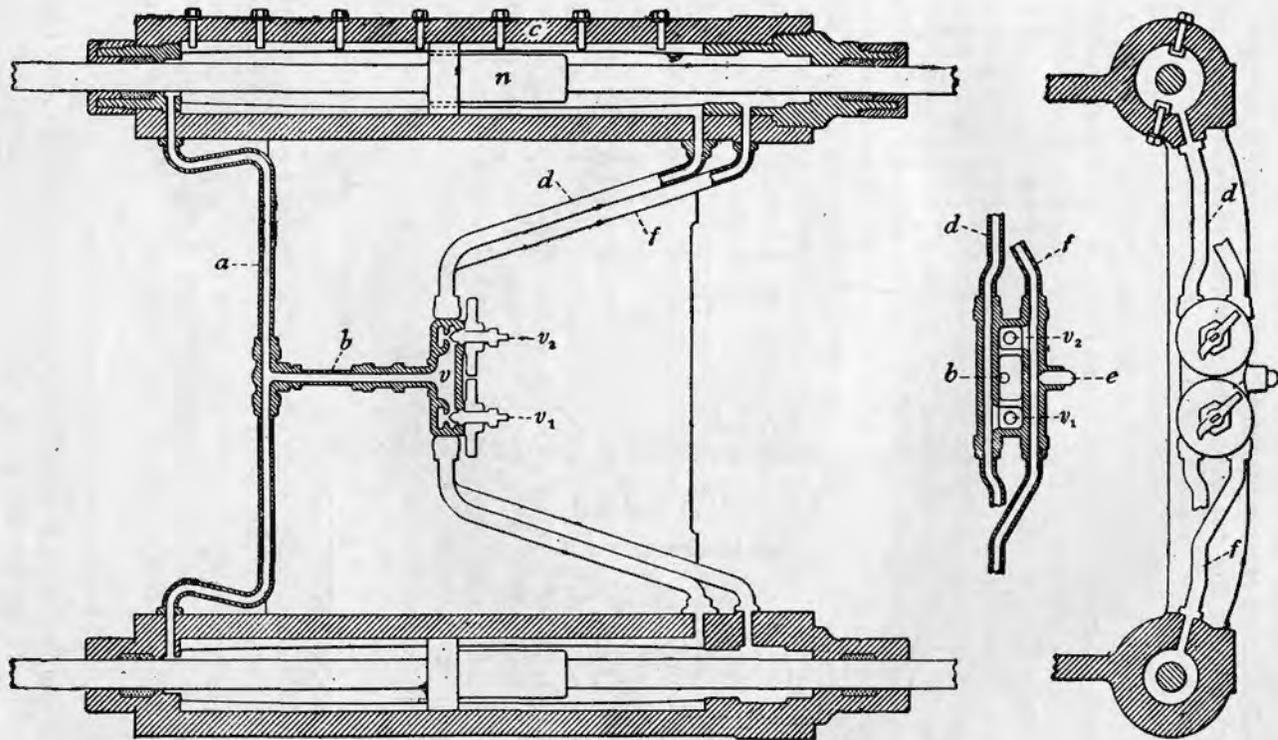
Horizontal recoil cylinders showing valve systems.
